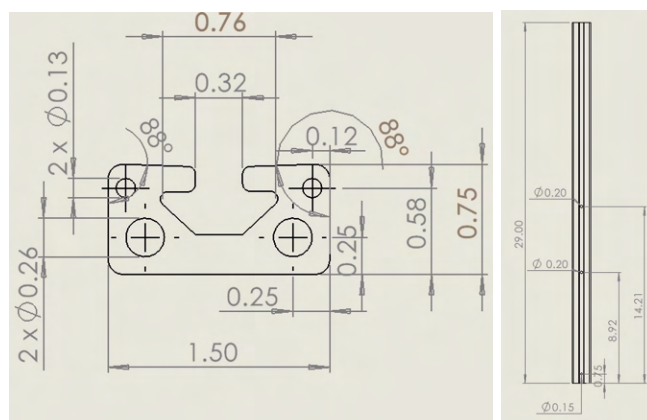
This figure shows the engineering drawings of the front profile and the top profile of the slider arm.
